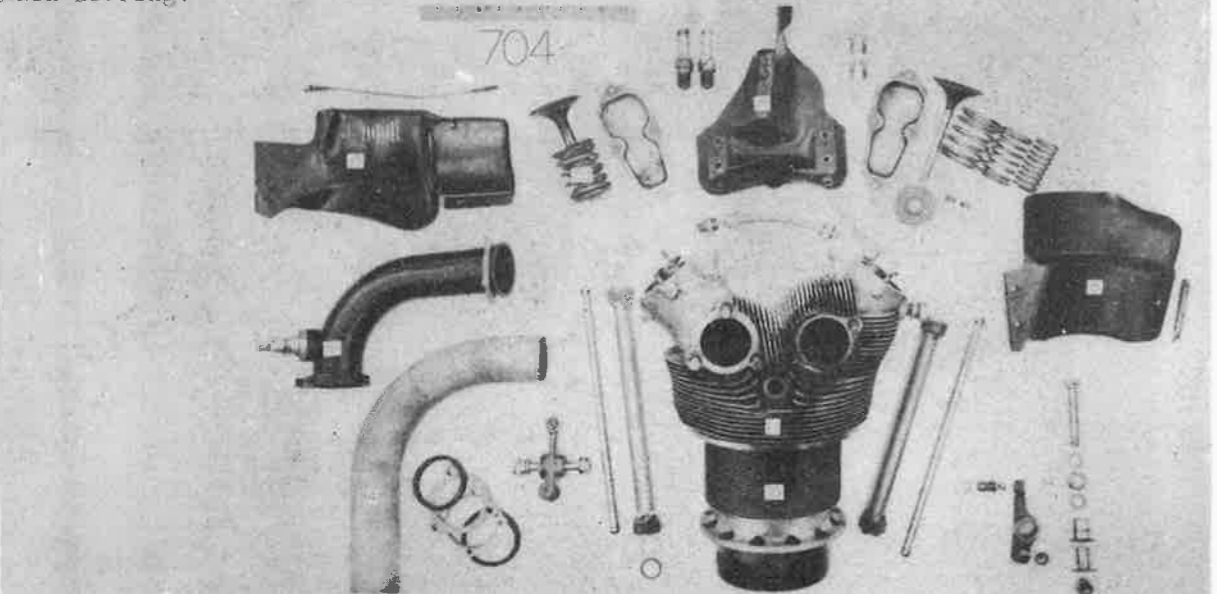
Disassembly of Cylinder Section: Valves, 33227
